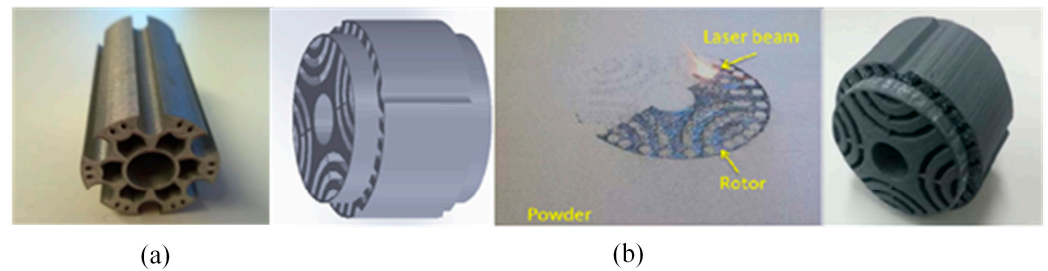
Electrical machine cores manufactured through AM techniques: (a) Rotor prototype of switched reluctance machine [37]; (b) Rotor core of synchronous reluctance machine [38].
